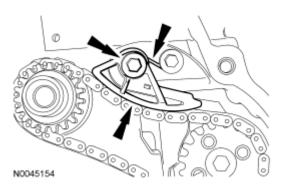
Locating Oil Pump Chain Tensioner And Bolt
